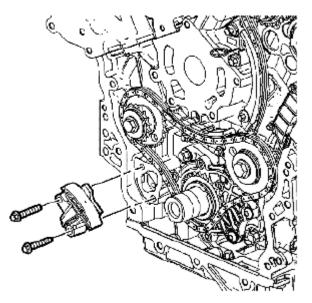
Identifying Right Bank Camshaft Intermediate Drive Chain Idler Courtesy of SUZUKI OF AMERICA CORP.
